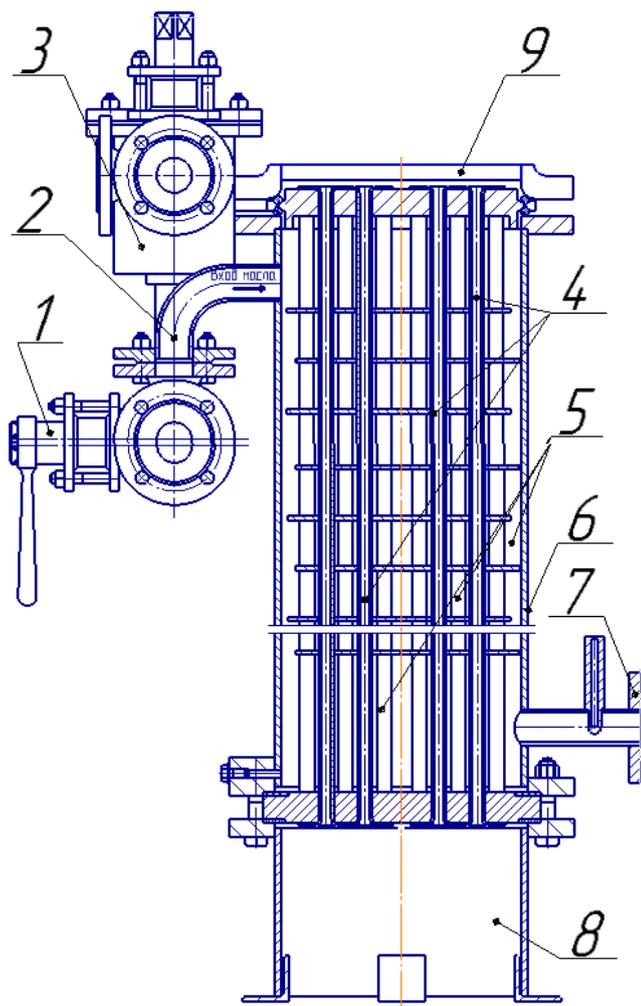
Oil cooler: 1 – oil regulator; 2 – oil inlet; 3 – oil filter; 4 – cooling air tubes; 5 – oil circulation channels; 6 – oil cooler body; 7 - oil flow outlet; 8 – air inlet module for airflow; 9 – airflow output channel
